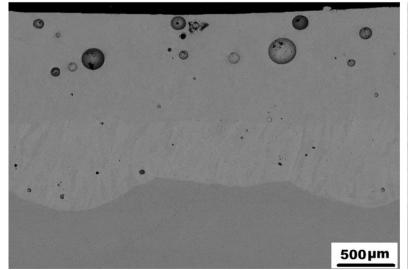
The surface of a weld cladding coating made from high hardness powder 10.16.6 on a layer of Inconel 625 — cracks appeared in the weld cladding coating
